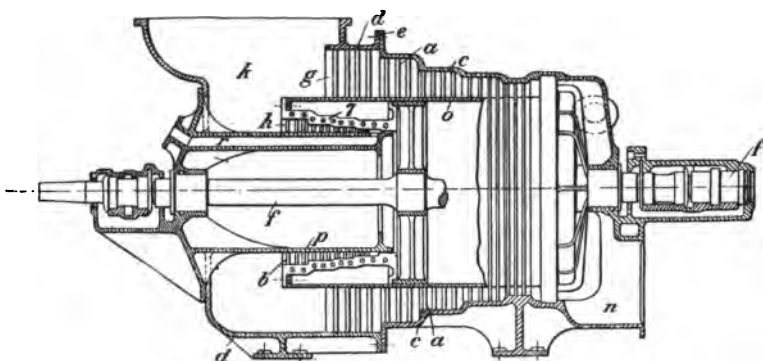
Parsons Arrangement of Telescoping Reversing Turbine within Main Turbine.
